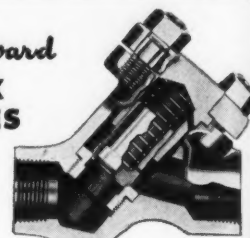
Series . . . Edward forged steel check valves are built in both ball and piston disk types in 600 or 1500 lb sp series at 850 F and may be used in either horizontal or vertical lines. Exclusive Edward design guide lip and spring loading insure quick positive seating. Design details include union or bolted bonnet construction, screwed, socket welding or flanged ends and 13% chromium stainless steel seats and disks. Built in sizes 1/4 in. to 2 in. inclusive.
